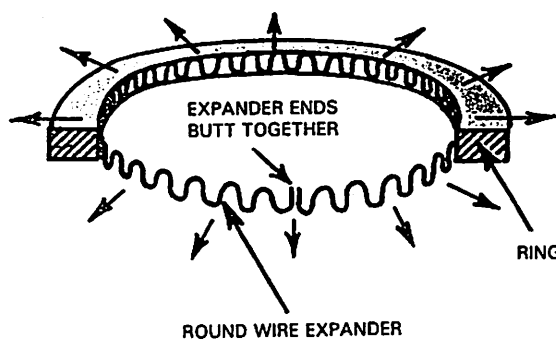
Round wire spring expander does not touch bottom of ring groove. When ring is compressed to enter cylinder, spring is compressed within itself to keep constant tension on ring.
